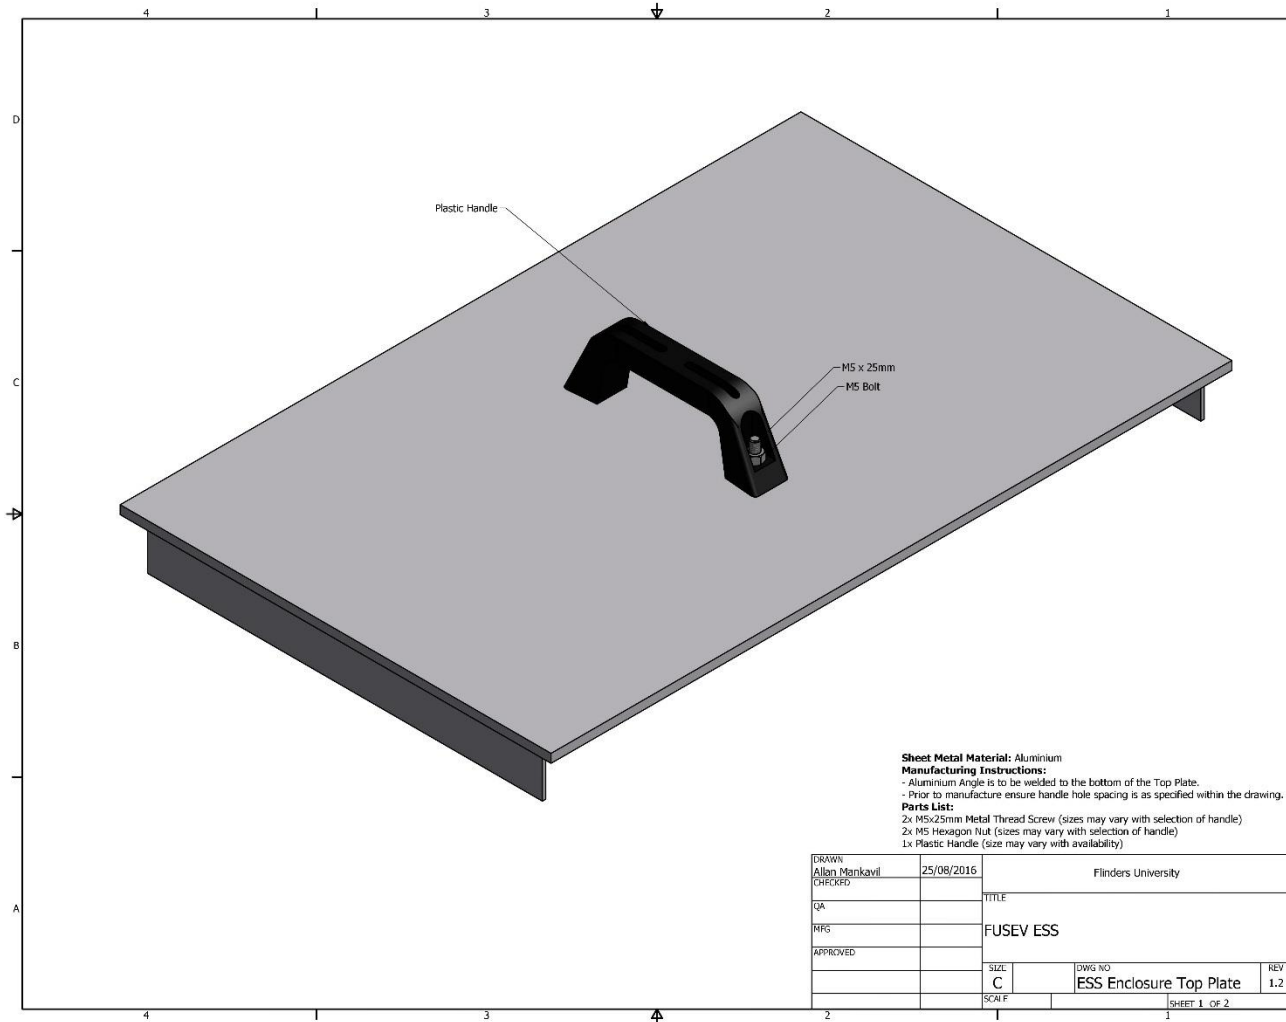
The mechanical drawing of the ESS Enclosure's Assembled Top Plate.
